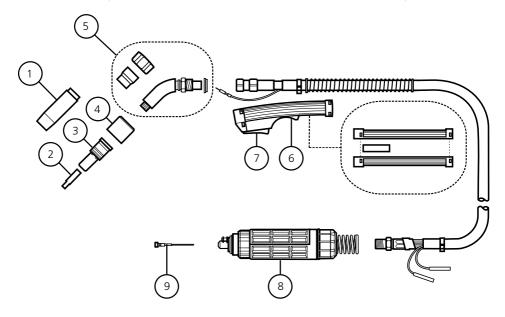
GUN007 (200 amp) 3.6 m Gun and Cable Assembly
